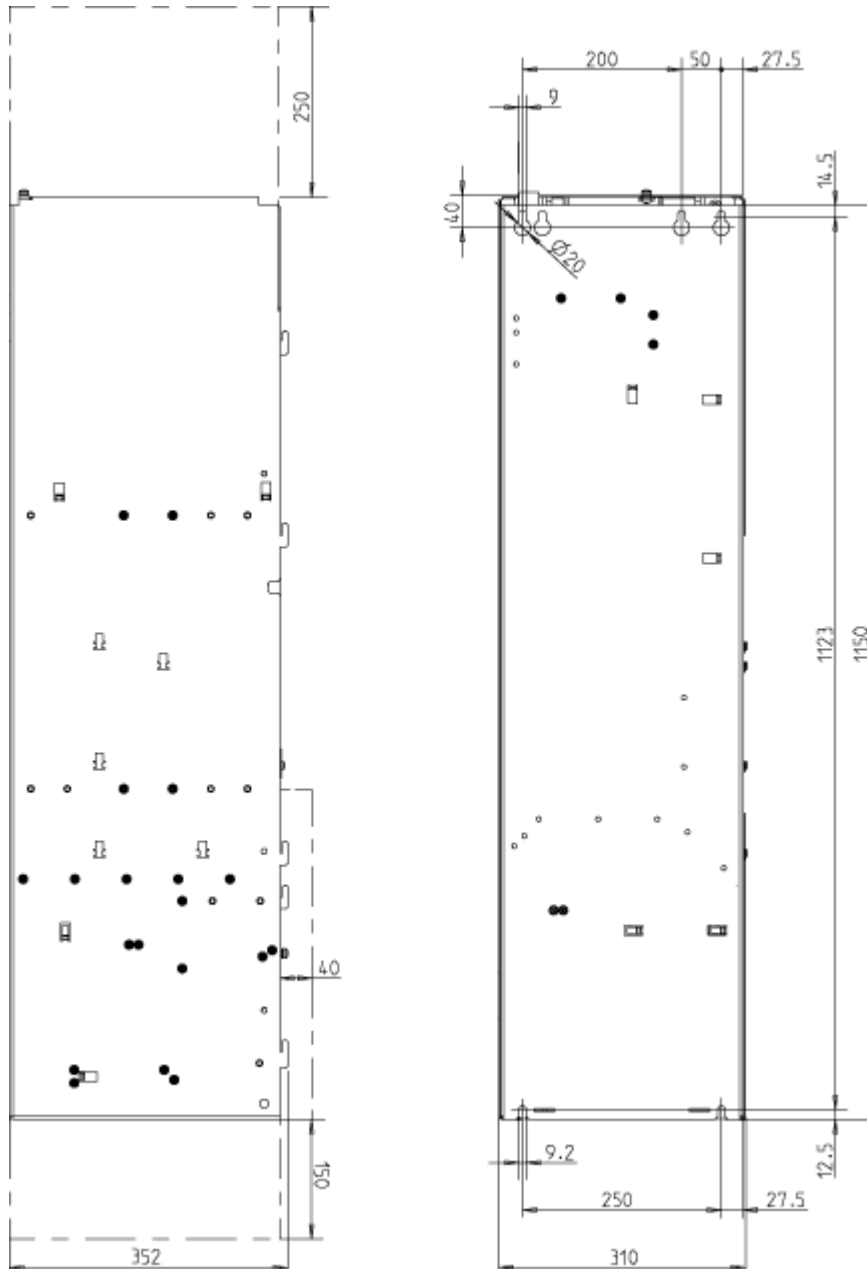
Dimension drawing, Basic Line Module, frame sizes FB, side view, front view
